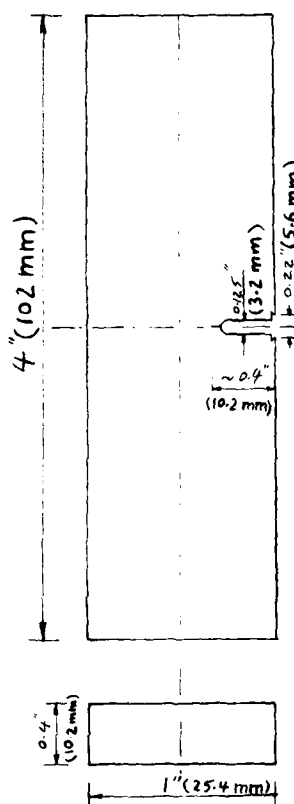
Single-edge-cracked specimen geometry used for fracture toughness (K_{IC}) measurements.
